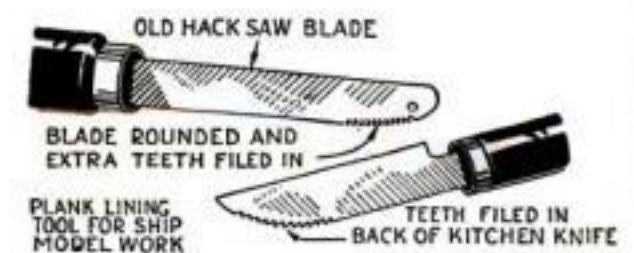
Either an old hack saw blade or a common paring knife can be used for the tool.
